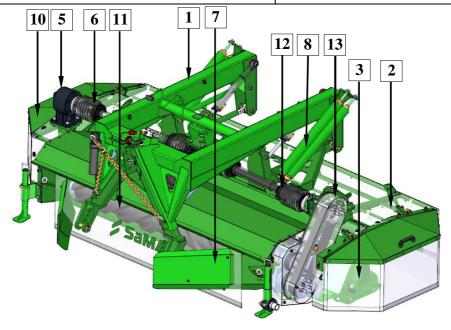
Parts of SaMASZ front disc mower with roller conditioner
